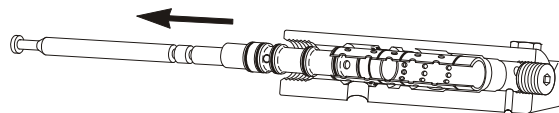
Insert tool in second row of holes in sleeve and if necessary, pry out with screwdriver.
